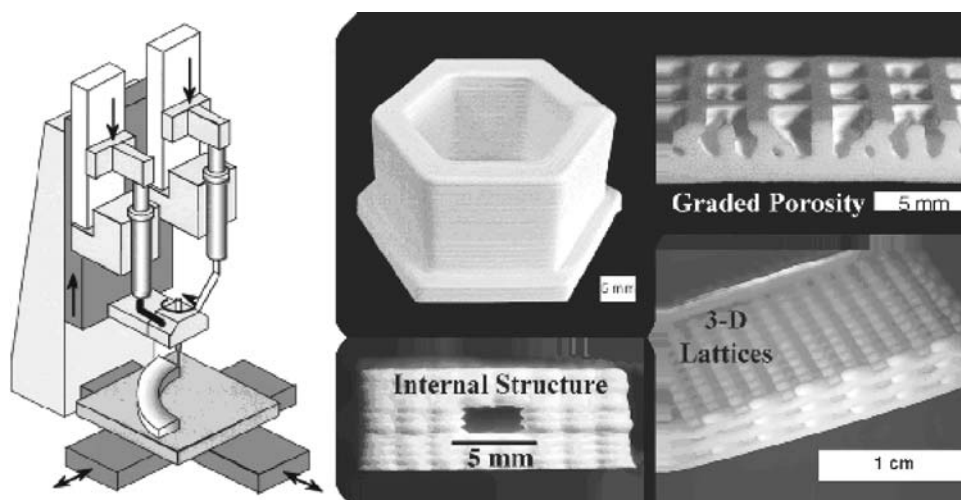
Three dimensional PZT lattices with (3-3) connectivity built by Robocasting.
